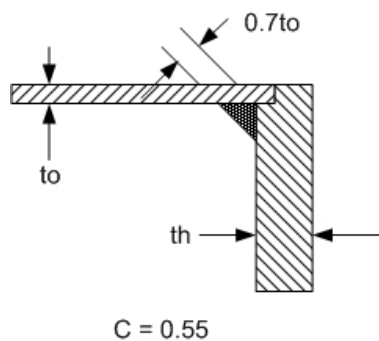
Value of  $C$  for plates welded with fillet weld
